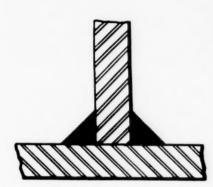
What happens when two sheets of metal are joined by one welded seam.
